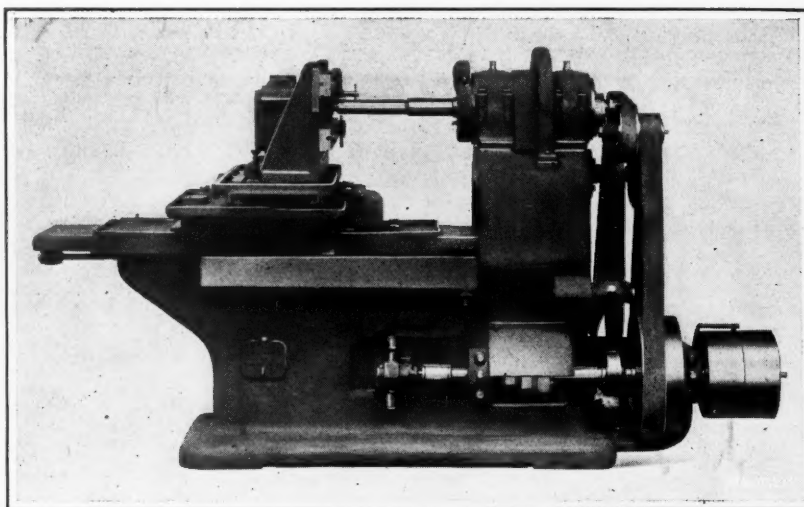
Rear View of Cylinder Grinding Machine showing the Driving Arrangement
